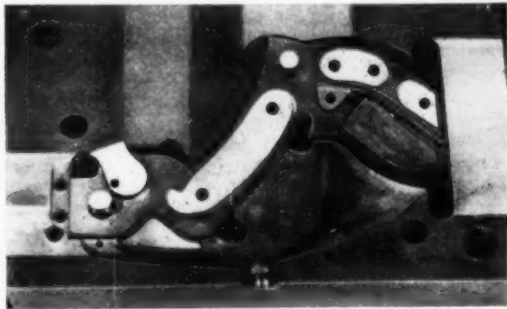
Lower half of oil-hardened tool steel die for die casting coin chutes for vending machine. Production time over 100 hours reduced to 36½ hours with a Duplicator.
